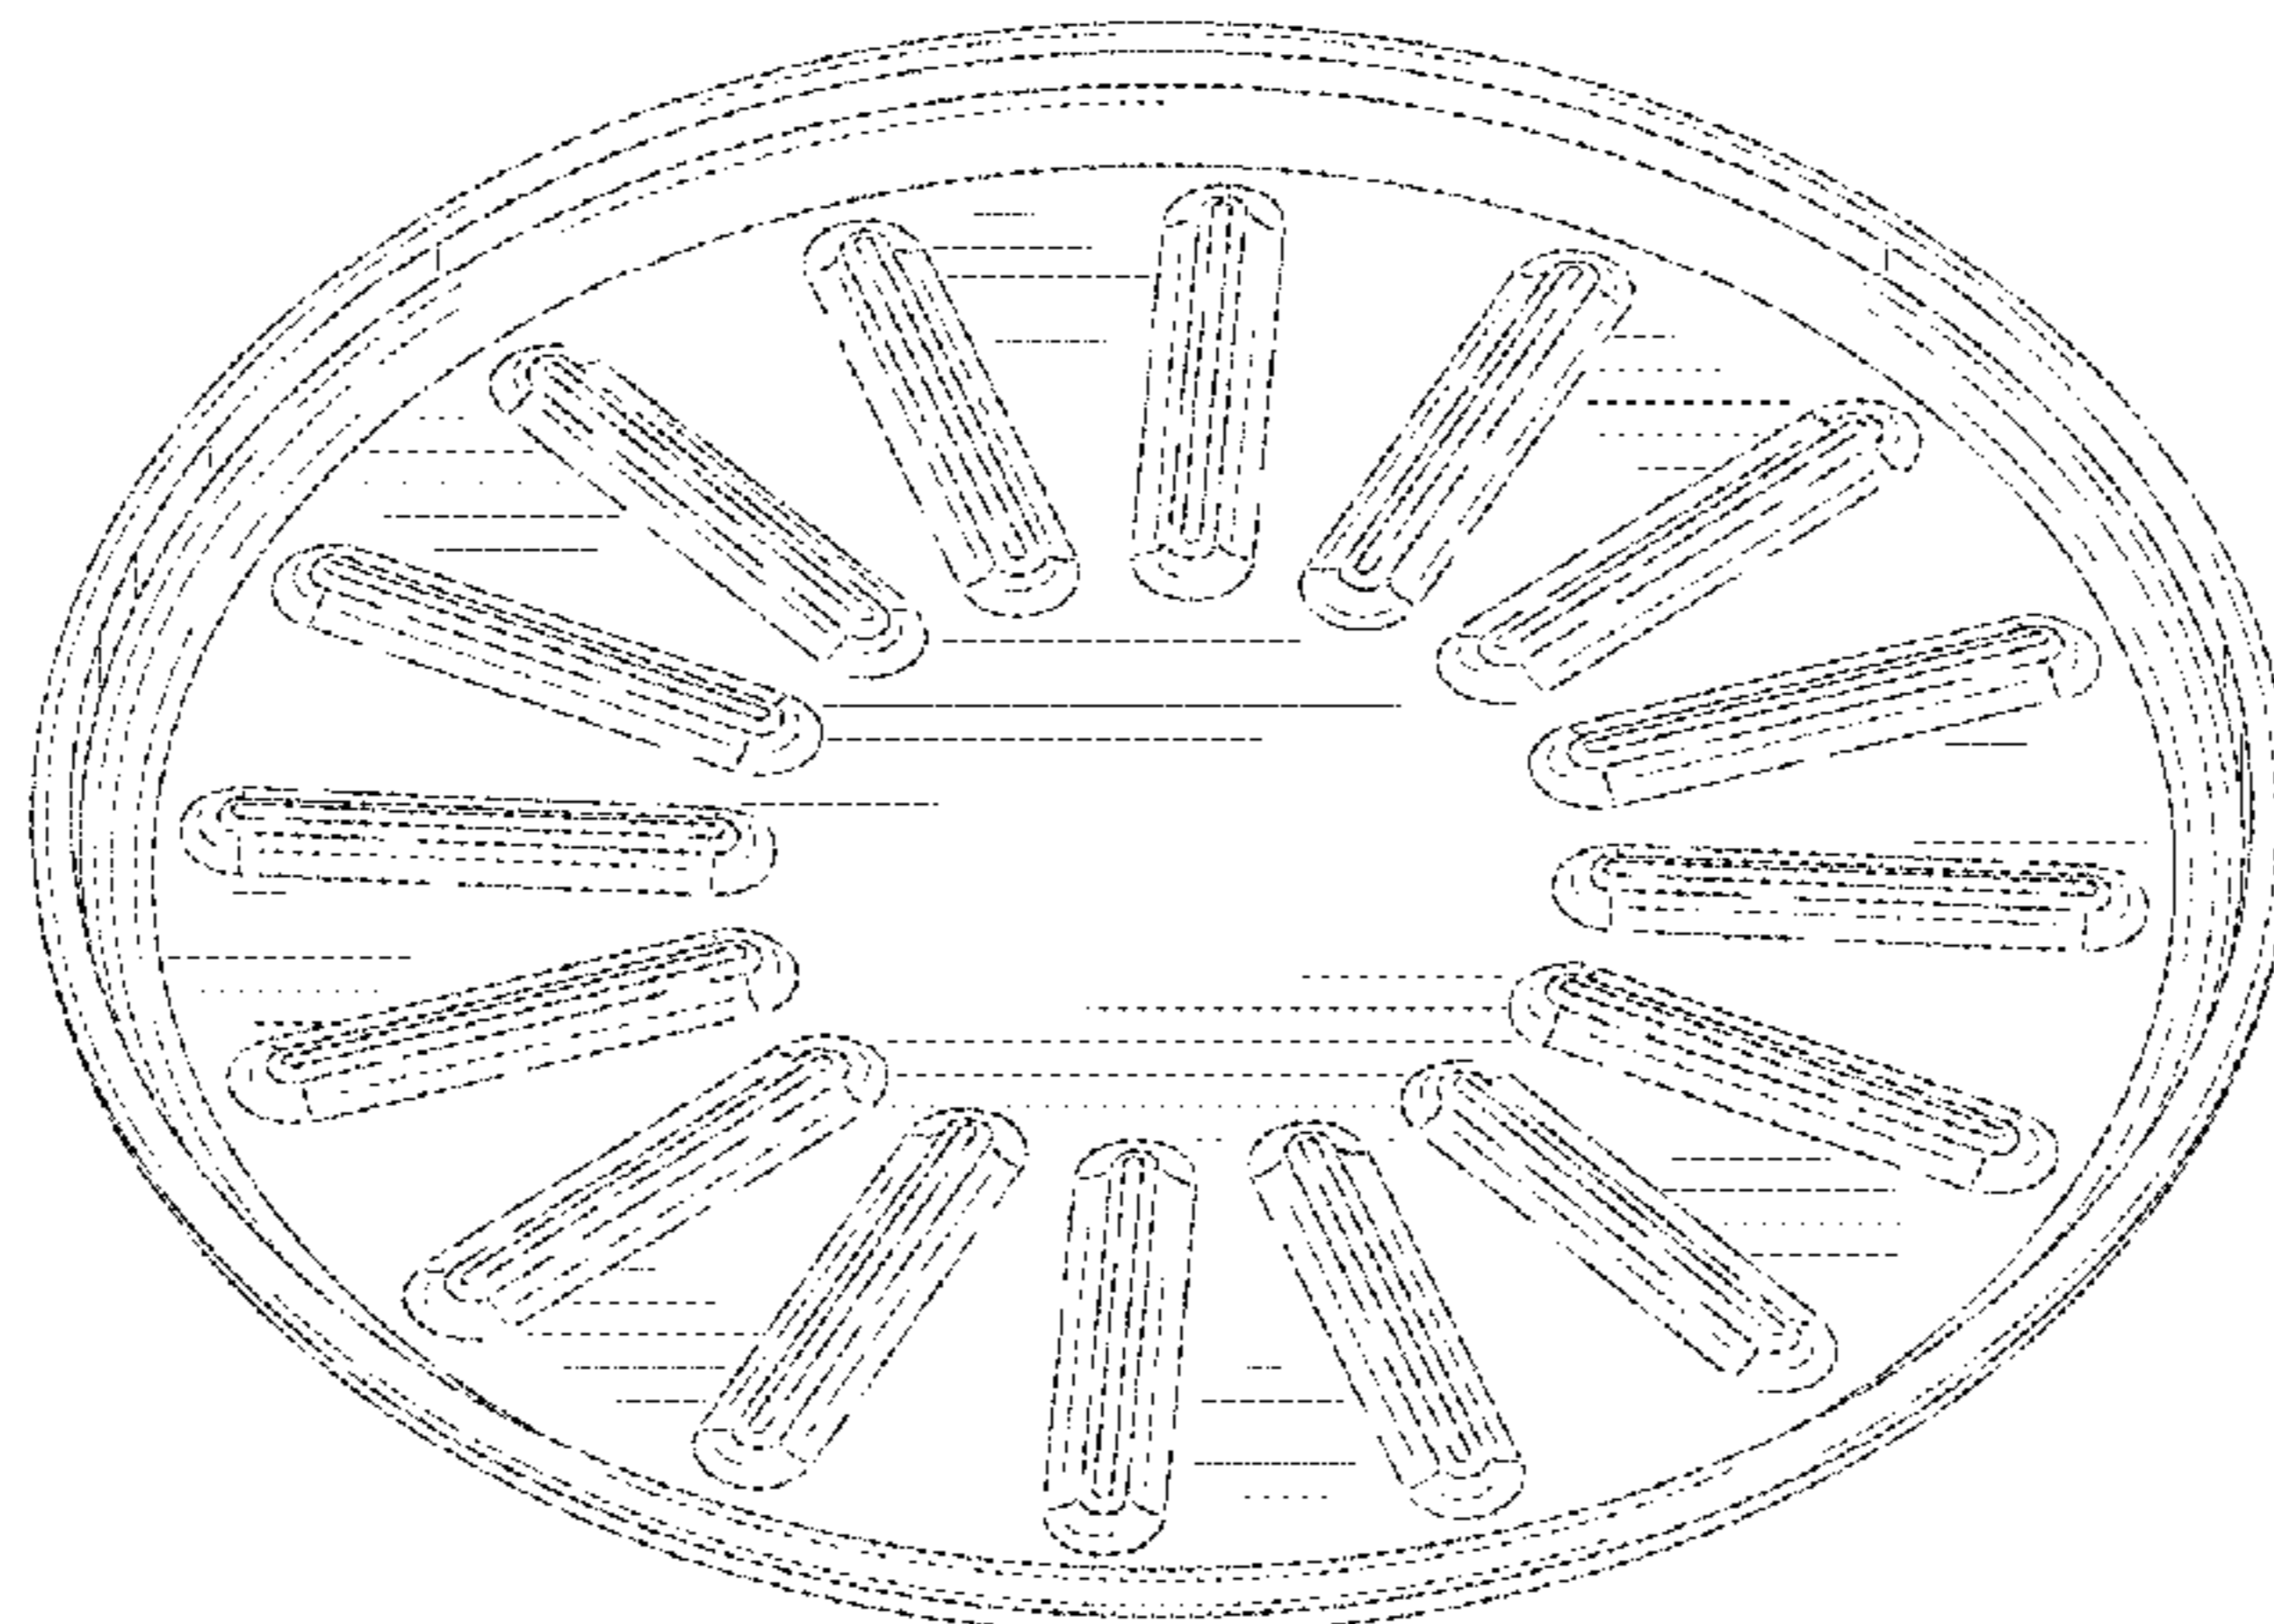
is a bottom perspective view of the embodiment shown in FIG. 24;
